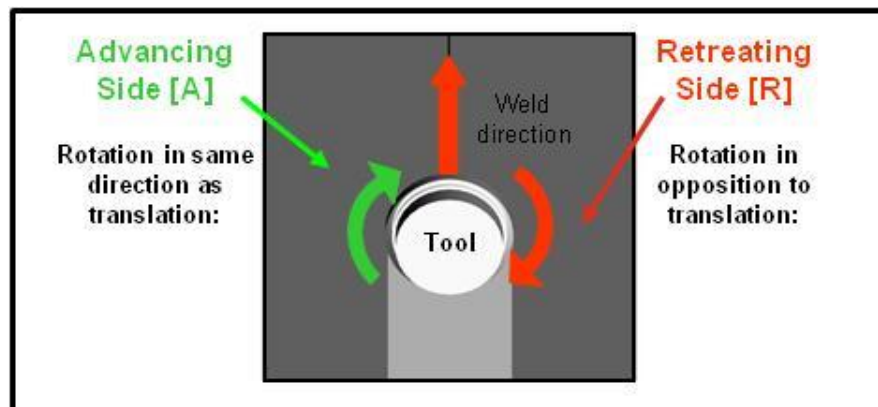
, Schematic of the Advancing and Retreating Sides of a Friction Stir Weld.
